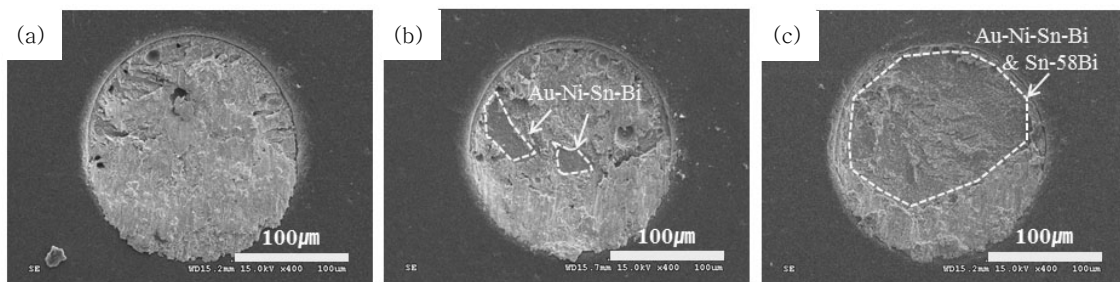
Fracture surfaces of the solder joints on ENIG finished substrate after aging at 125°C for: (a) 0, (b) 300 and (c) 1000 hours
